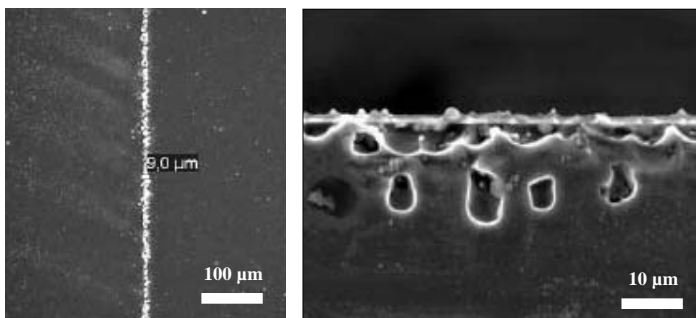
Fine cutting of silicon wafers: (left) plan view of cut and (right) cut edge.
